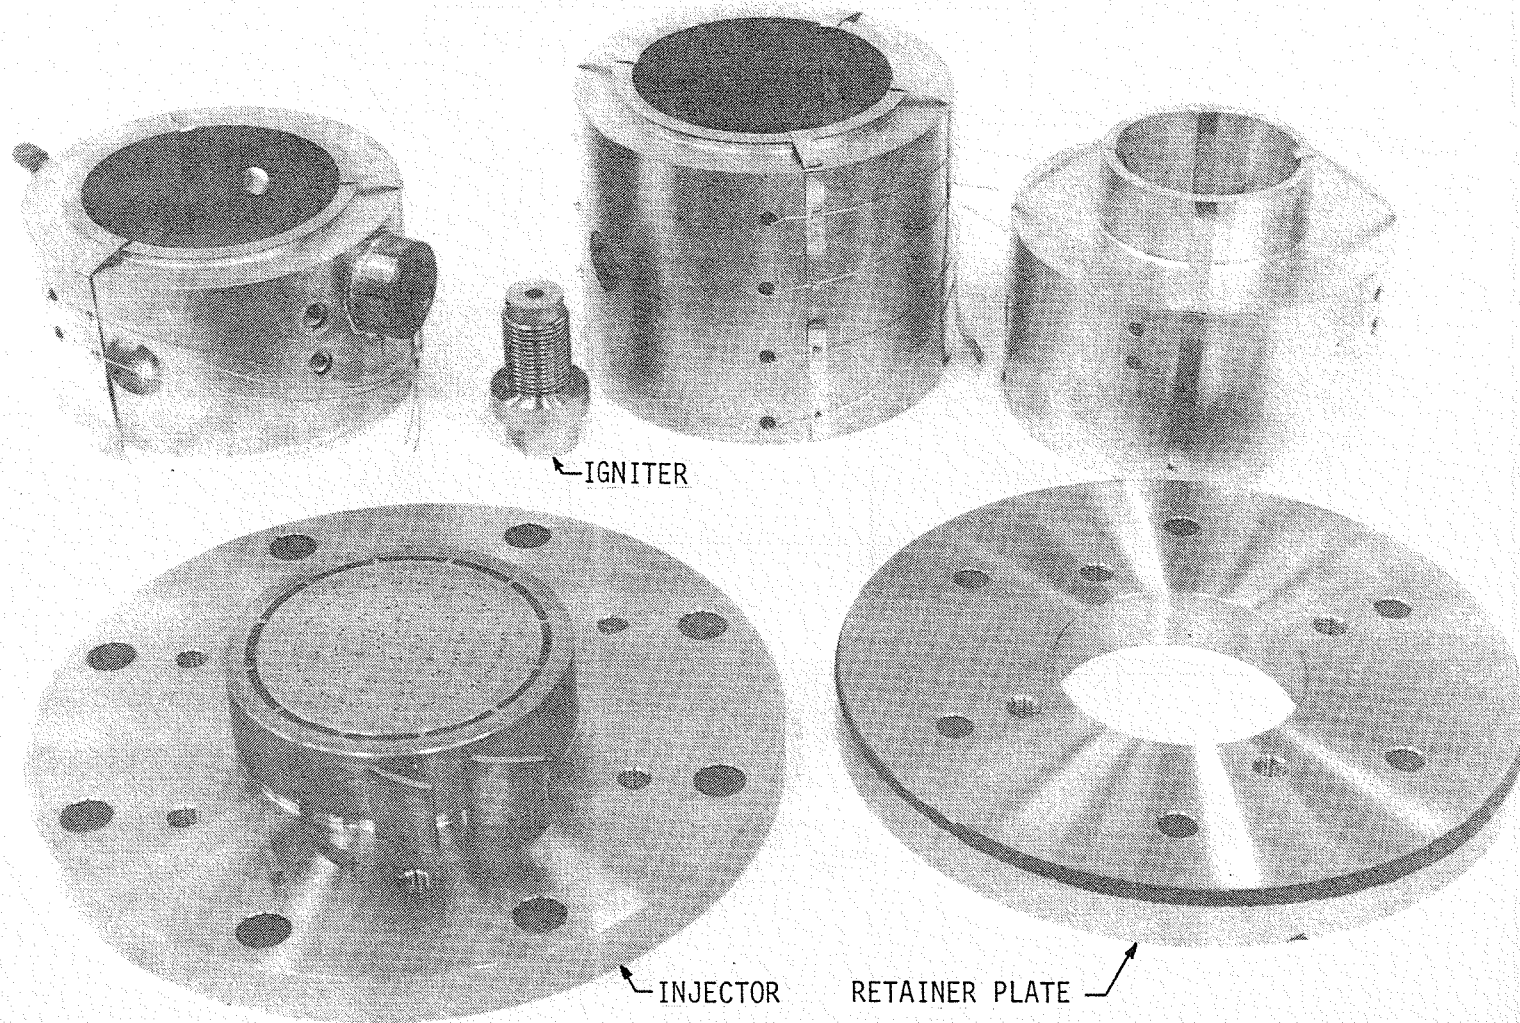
LOX/Propane Thrust Chamber Assembly (Pictorial View)
